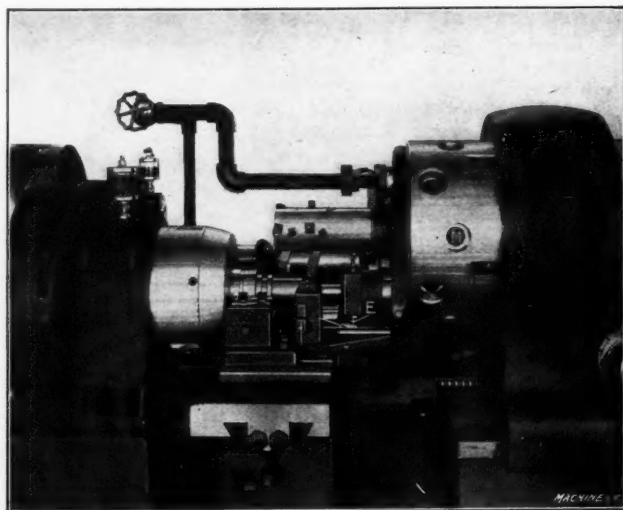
Recessing Attachment in Operation on Cleveland Automatic Machine
